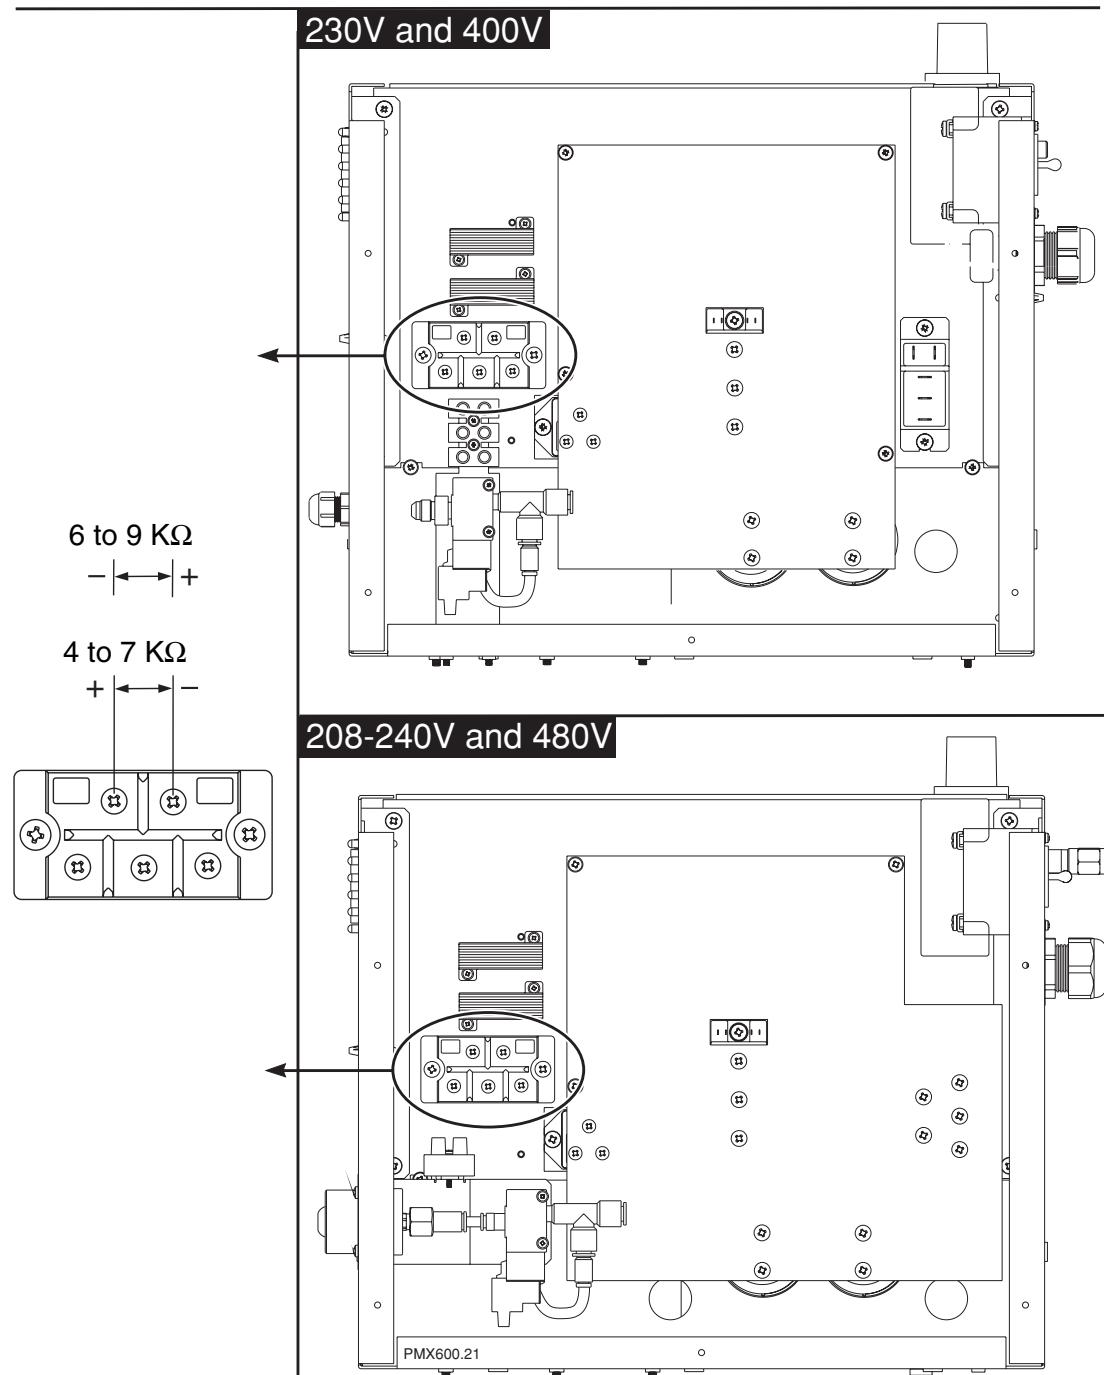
Resistance Check #2 - Power Board to Chassis
